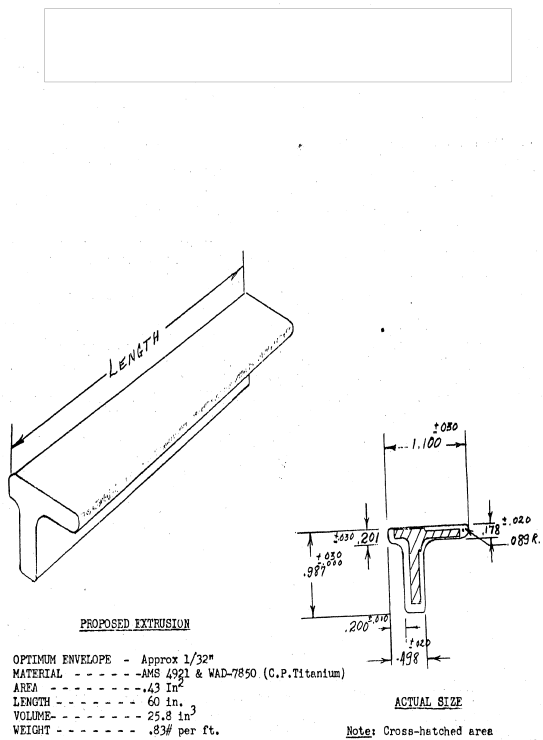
OPTIMISTIC ENVELOPE SHAPE FOR THE EXTRUSION P/N 226956, FLANGE, REAR MAIN BEARING VAPOR DUCT ASSEMBLY.
